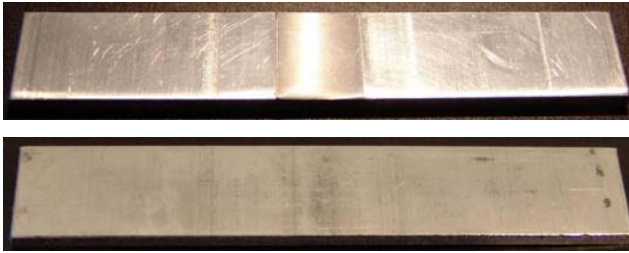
Visual inspection of FSW joints, top and bottom surfaces.
